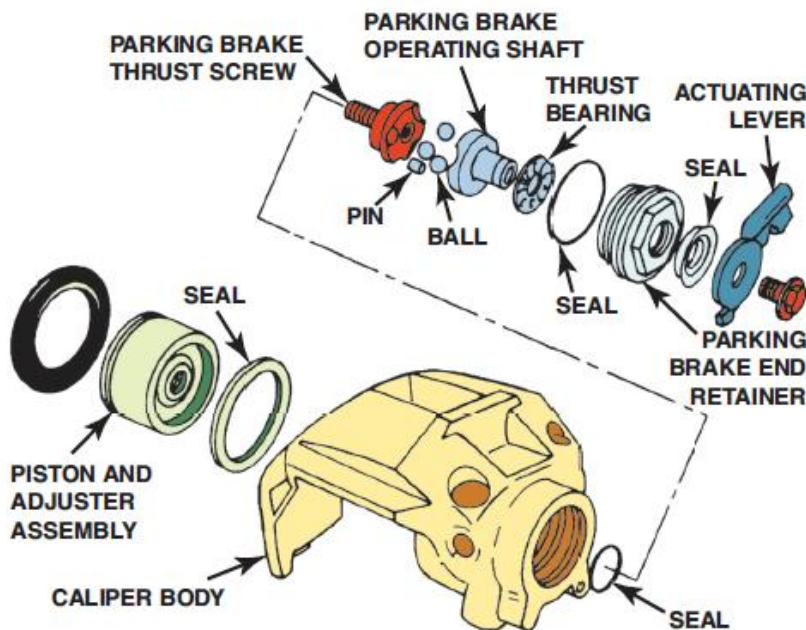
A rear brake caliper often includes a parking brake mechanism.
